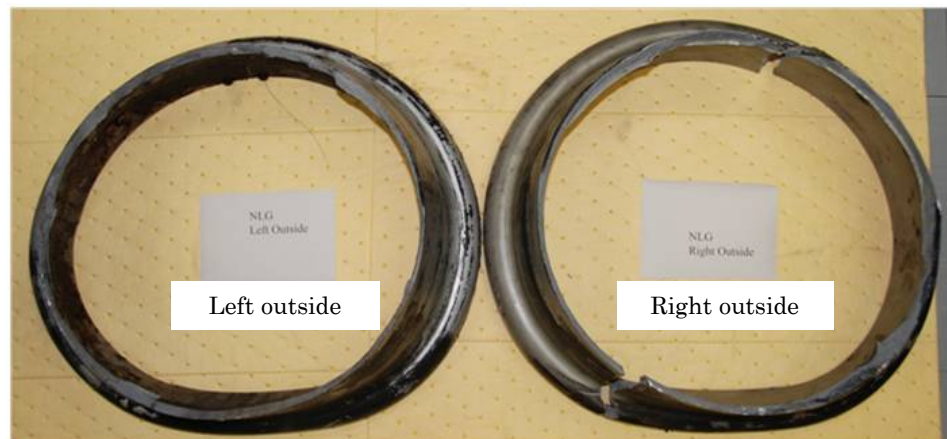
Fractured Pieces of NLG Wheels (Rim)
